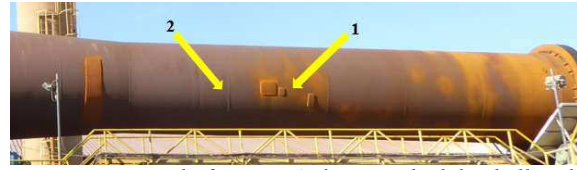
Detail of Figure 1 showing the kiln shell with welded repair patches (e.g., arrow 1), and a repair consisting of a single weld bead (arrow 2).
